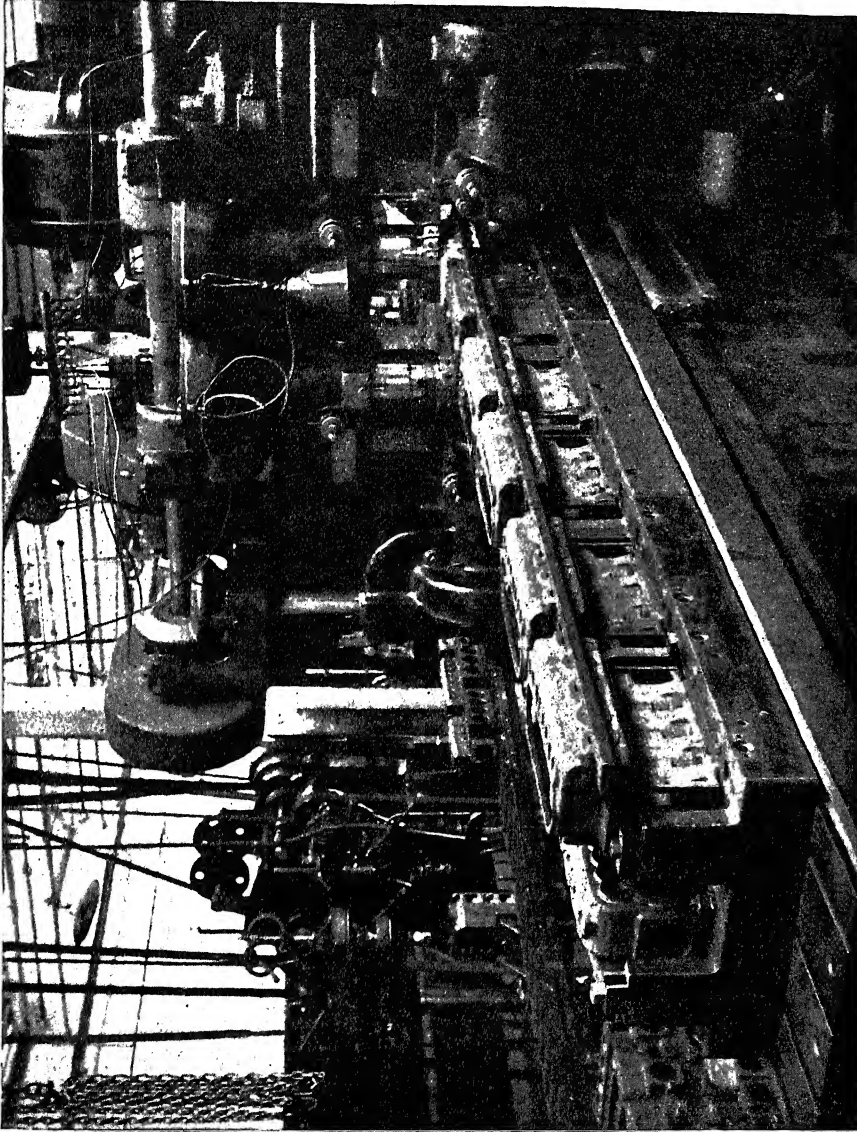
Twelve Motor Cylinders in a Fixture being Milled on an Ingersoll Machine. View from side
